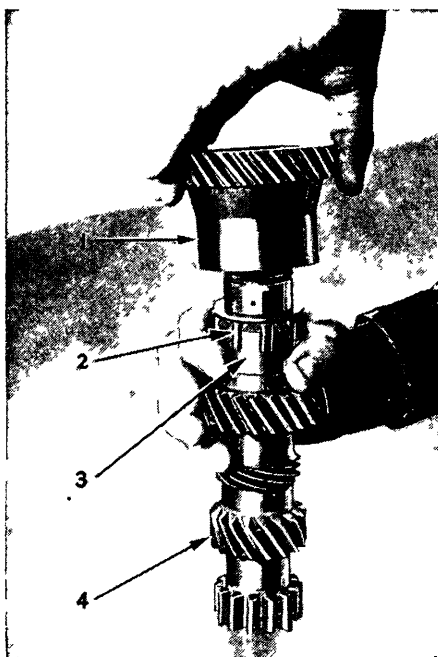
Assembling countershaft free wheeling gear. 1941-42 vacuum-operated transmission. 1. Free wheeling gear. 2. Rollers. 3. Roller retainer. 4. Countershaft gear
